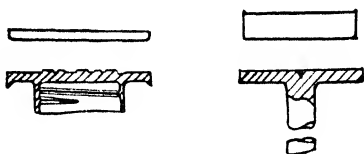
Cross-sections of parts 8 and 11, Fig. 220; a tube cap and a nail respectively showing flow marks on their top surfaces.
